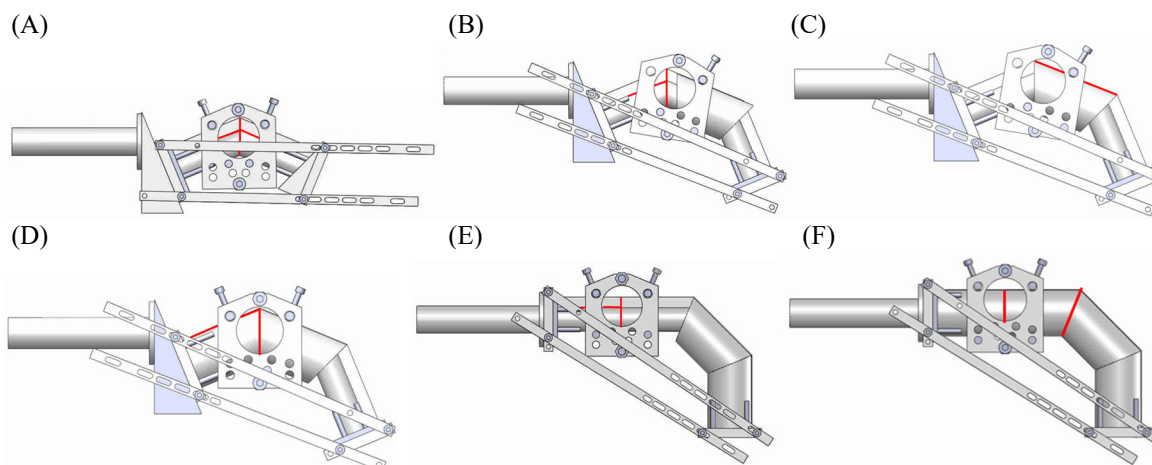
EBW jigs to fix the assembled parts of CSWG.
